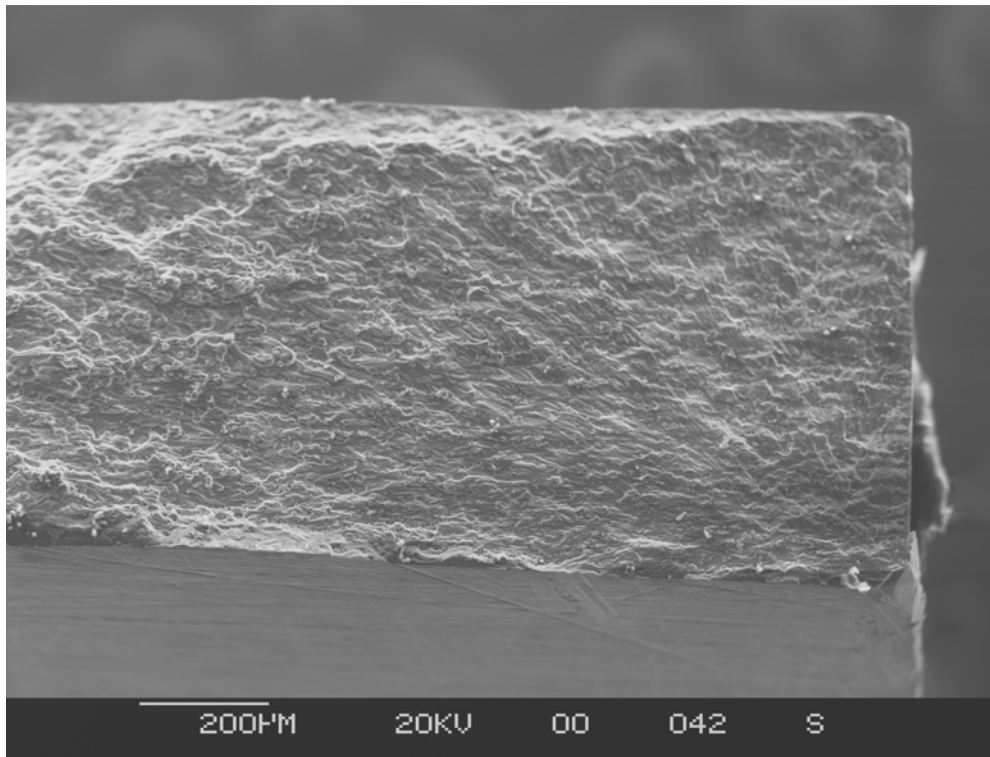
Fatigue Crack on Fracture Surface of Specimen 5931.
